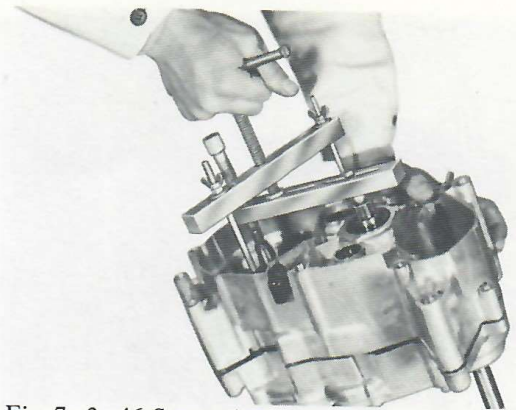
Separating crankcase with crankcase separating tool (special tool No. 09910-80112)
